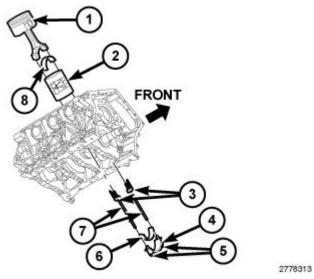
Piston, Connecting Rod Cap, Bolts, Plastic Guide Plates & Guide Pins Courtesy of CHRYSLER GROUP, LLC
